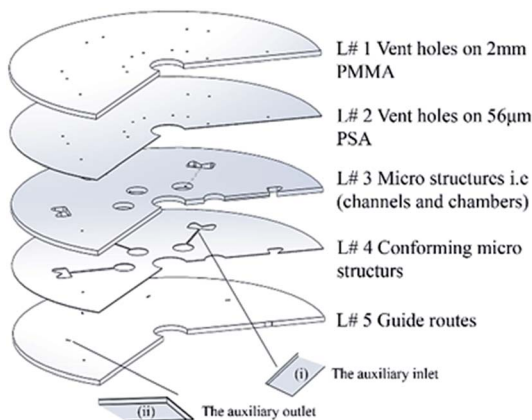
An exploded view of the disc assembly. Guided routing valves (GR) are located on the fourth and fifth layers of the assembled disc.
